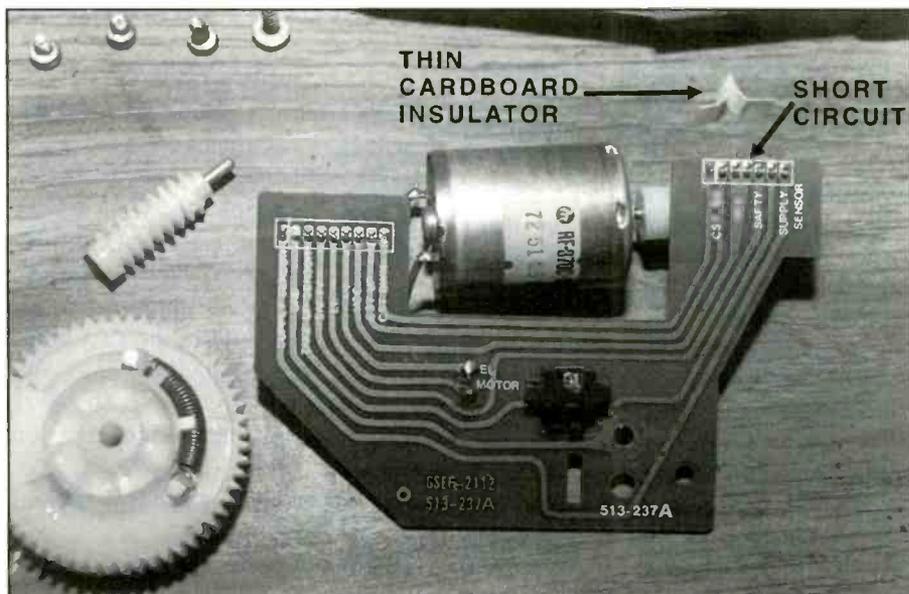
Here you can see the circuit board mounted on the right hand side of the tape transport mechanism. Any pressure applied to the board or the connecting wires would cause the unit to shut down.
